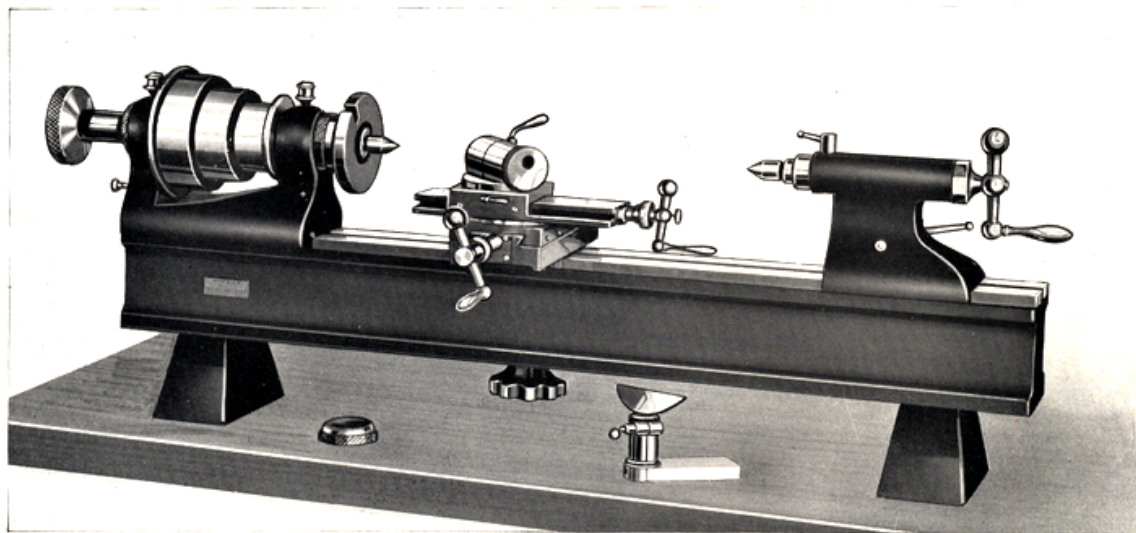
Rivett Plain Precision Bench Lathe No. 505 with standard equipment, except less countershaft and treadles.
